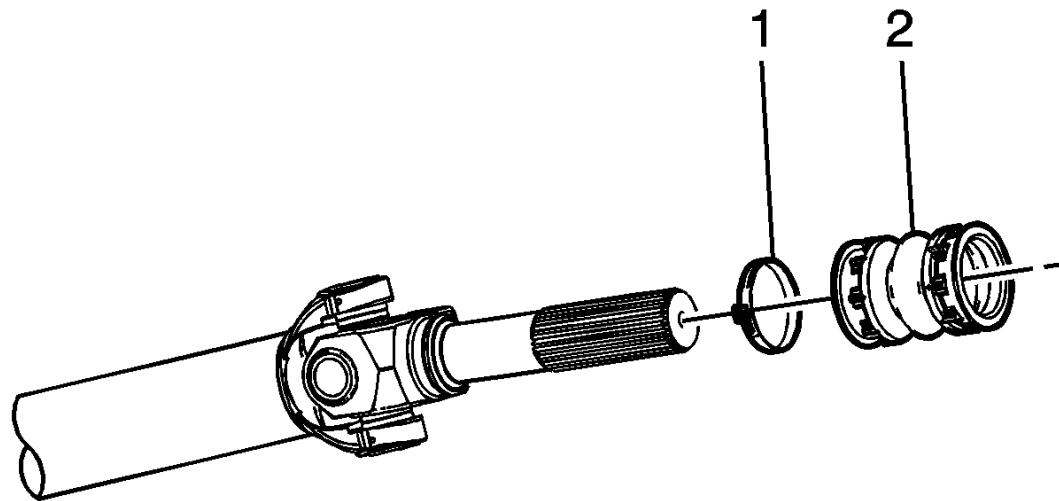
Propeller Shaft, Clamp And Shaft Boot
